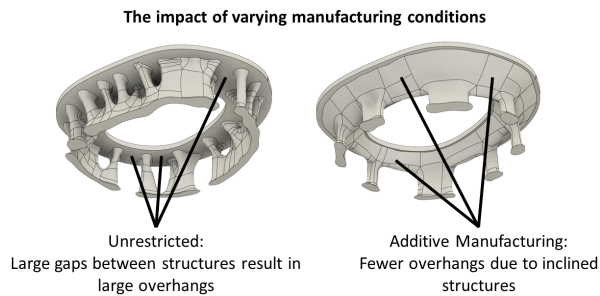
Ring-shaped element, designed with different manufacturing conditions using the GD tool in Autodesk Fusion 360; force as a load in each case
